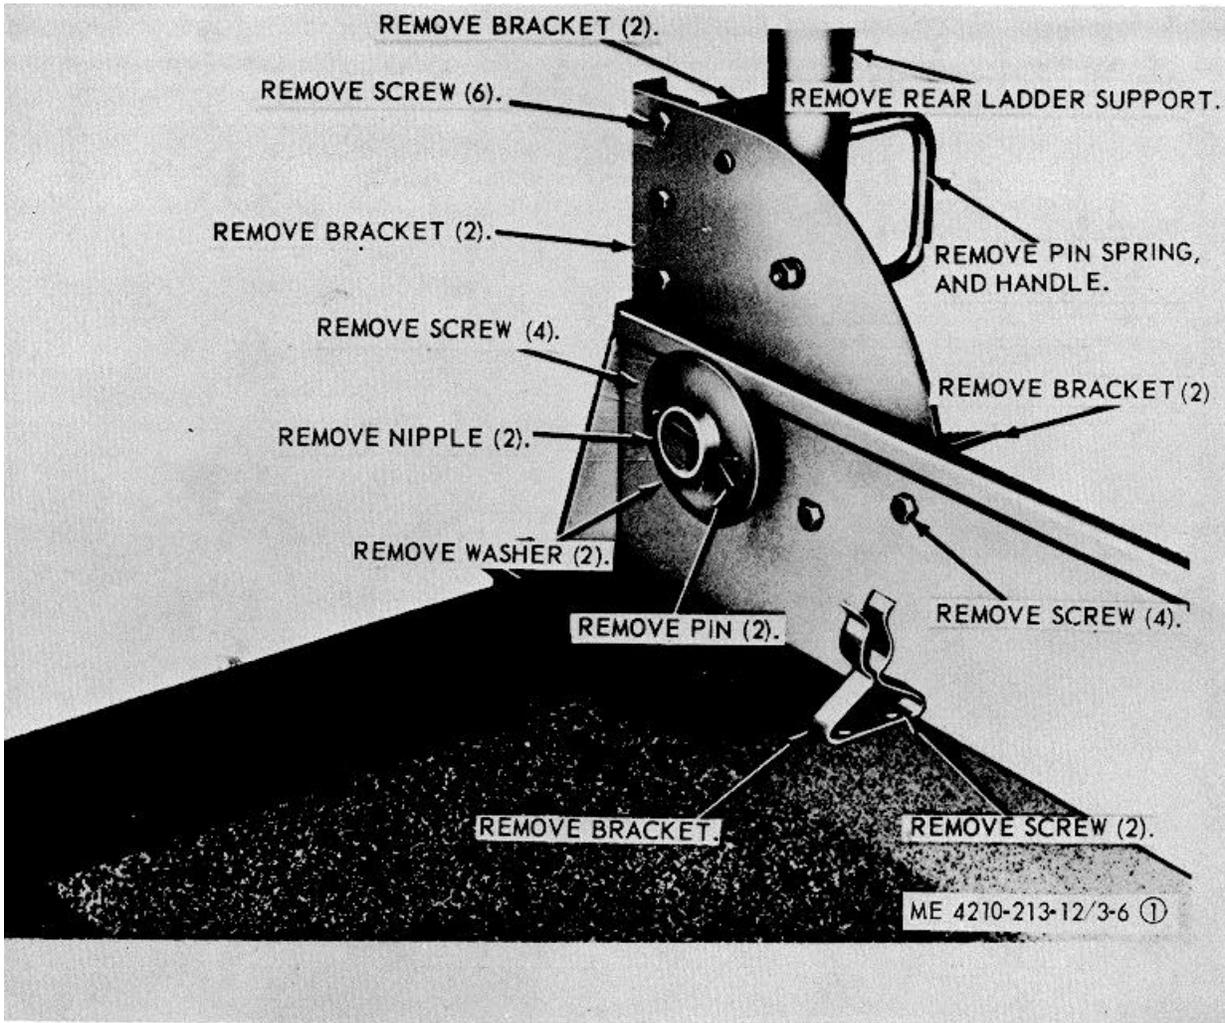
Ladder support assemblies, retainers and fill door removal and installation.
